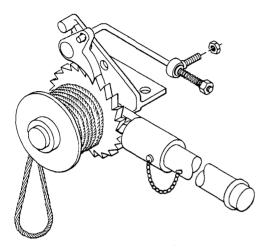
Load Binding Winch Assembly (P3T Trailer)
